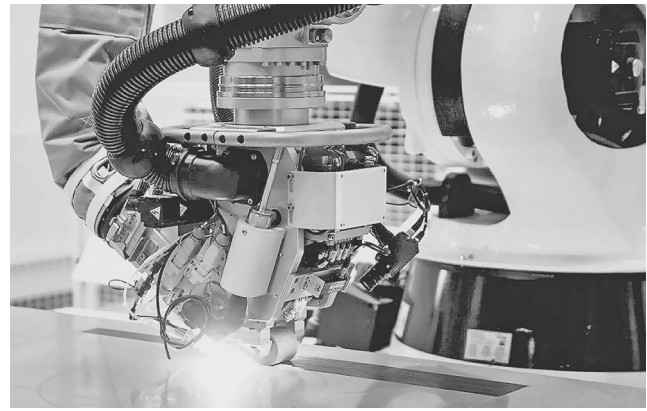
Machining head of six-axle KUKA robot used in Coriolis Composites system.
